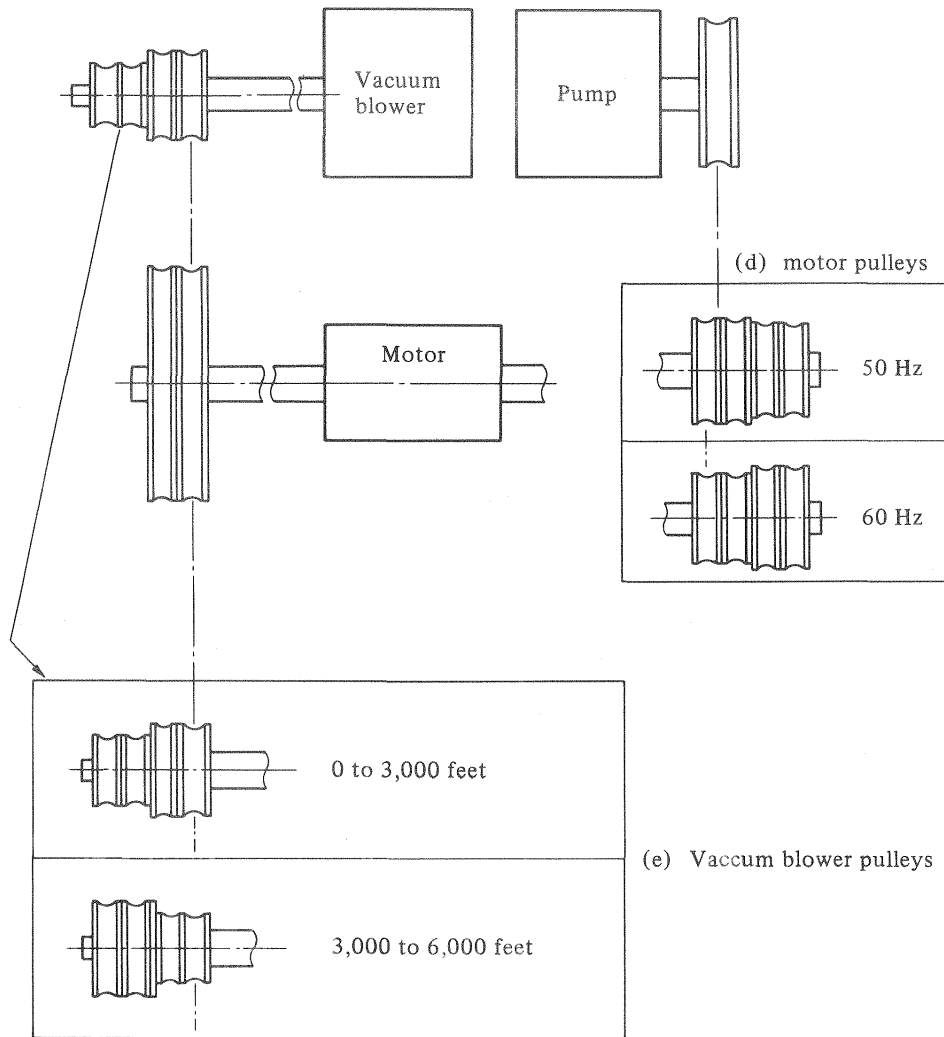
Air supply unit: vacuum blower and motor pulleys (2/2)
